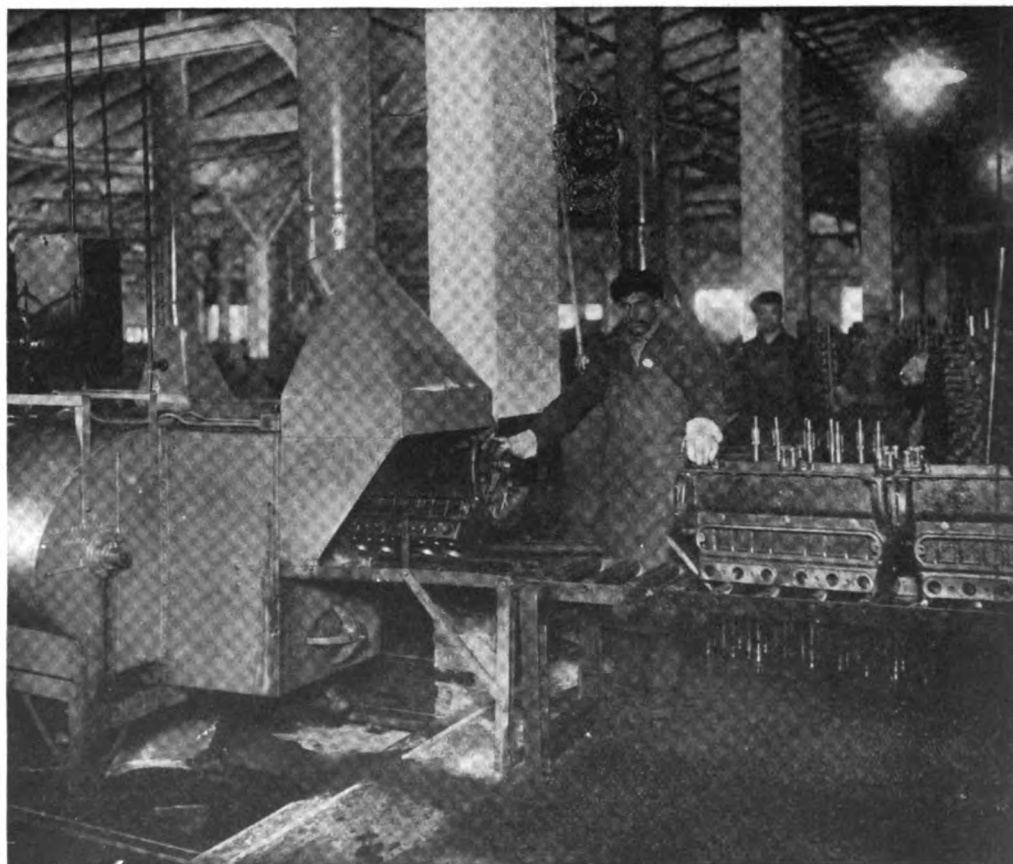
Cylinder blocks leaving the gravity roller conveyor of the machine shop department and entering the assembly department through the washing machine
